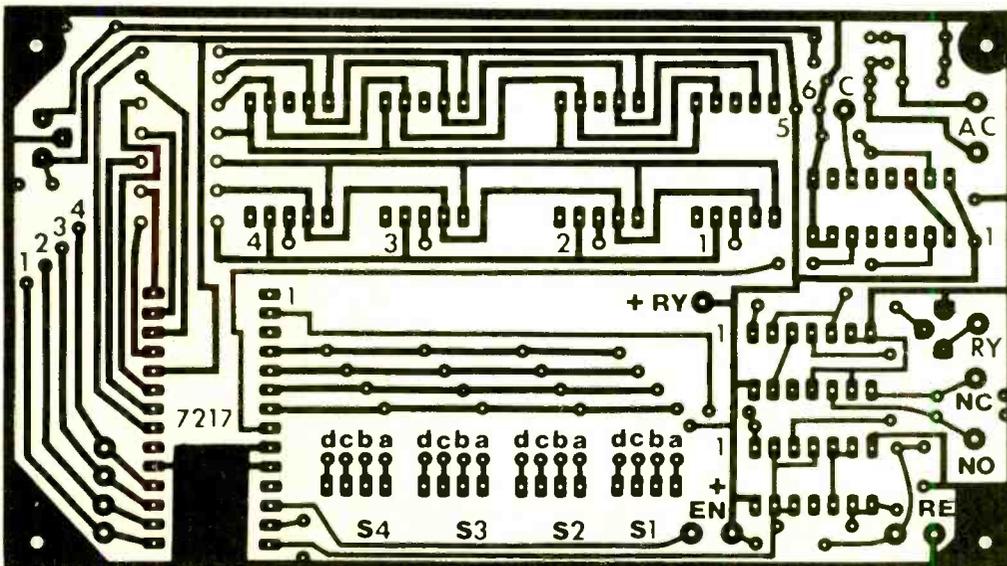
FOIL-SIDE-UP diagram of the printed-circuit board used to assemble the heart of the timer circuit. Beginners should resort to using this printed-circuit layout.
